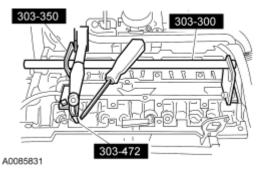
Identifying Special Tools (303-300, 303-350, 303-472) Courtesy of FORD MOTOR CO.
